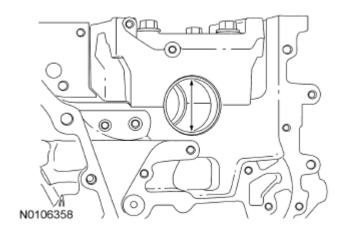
Measuring Crankshaft Block Main Bearing Bore Diameter Courtesy of FORD MOTOR CO.
